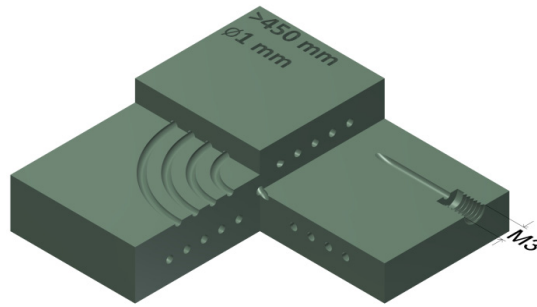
Stacked spiral of $36 \times 36 \times 18 \text{ mm}^3$ dimensions, 1 mm channel diameter, 45 cm total column length, and integrated M3 threaded connectors.
